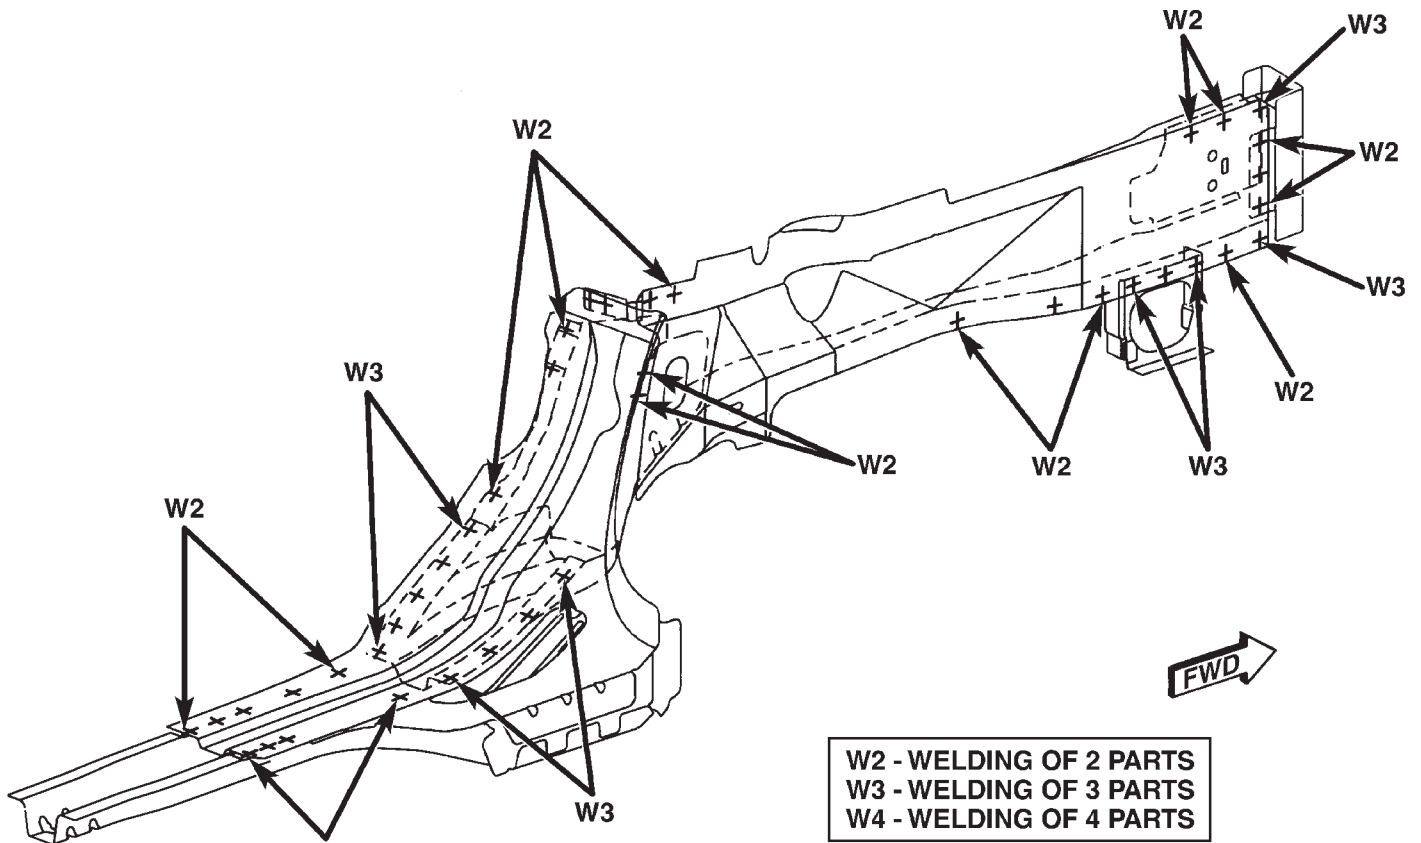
REAR FRONT SIDE RAIL TO REAR FRONT RAIL CAP TO REAR FRONT SIDE RAIL PLATE
